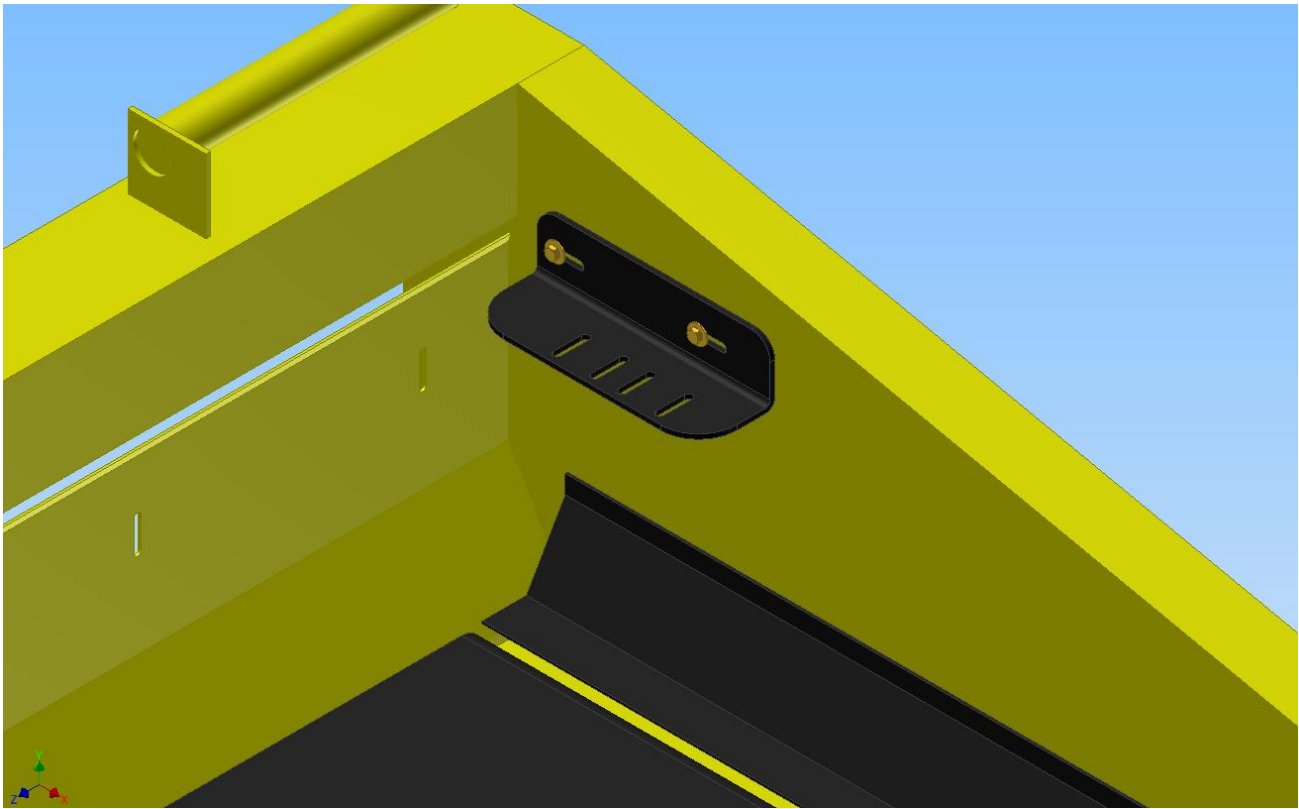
LH END MOUNT BOLTED IN PLACE 406631
